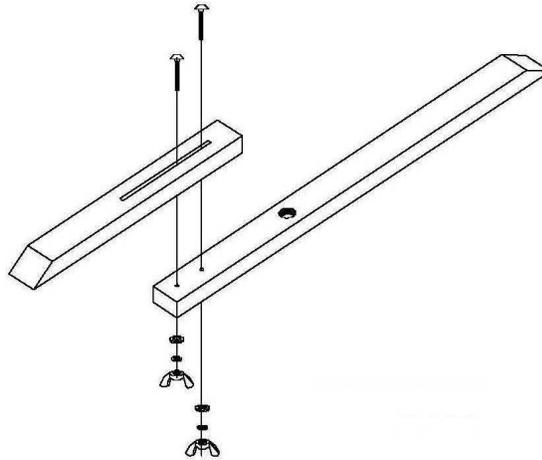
GPS Mounting Bracket Assembly (J700-1A4MP1)
